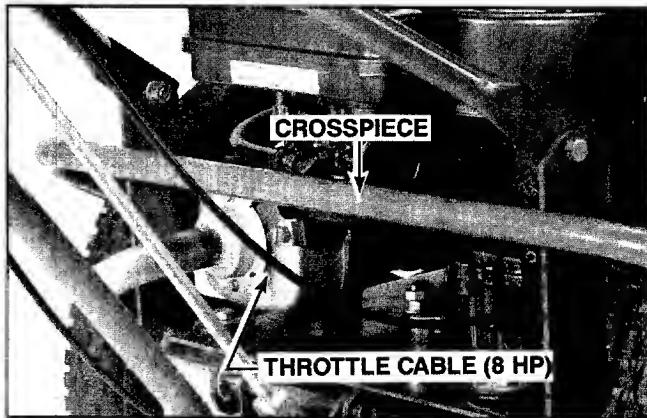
Throttle cable goes below crosspiece on 8 HP engine (as shown above), and above crosspiece on 5 HP engine.
